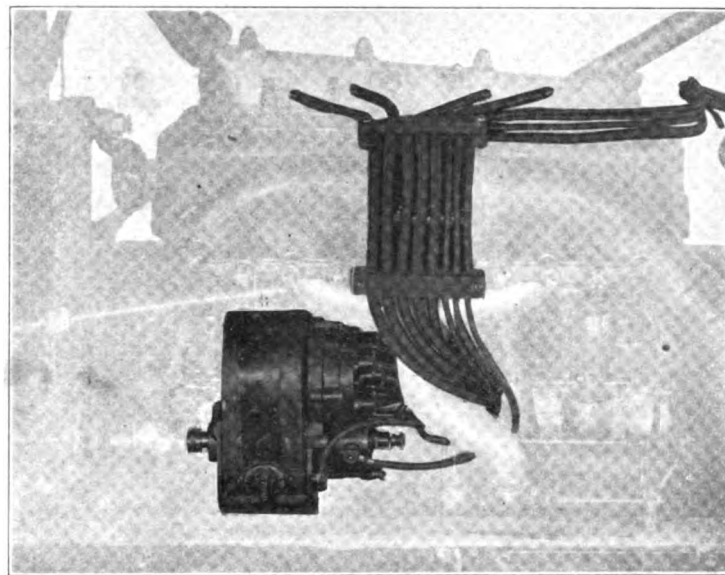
ARRANGEMENT OF WIRING ON FLANDERS MOTORS
